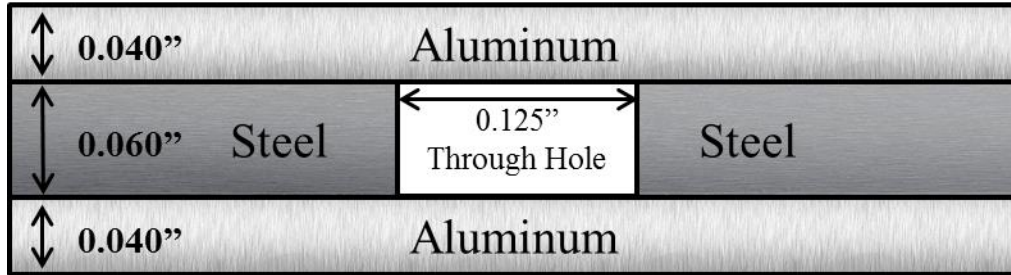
The proposed through hole method. A 0.125 inch hole is punched in the steel directly in line with the RAFSSW weld zone. The size, location, and orientation may be altered.
